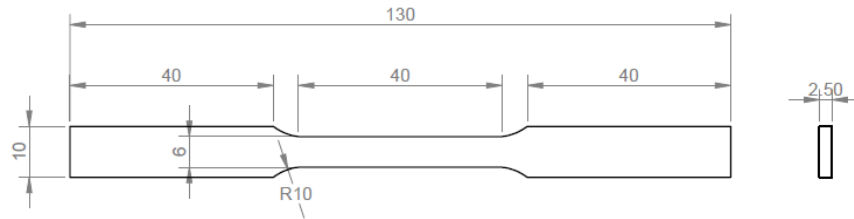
Dimension of tensile samples built using the default SLM parameters
